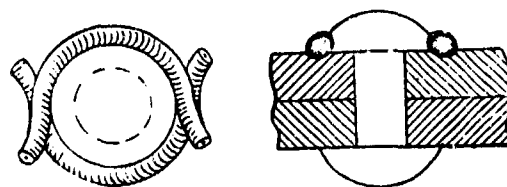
Diagram Showing the Welding Around a Rivet.
